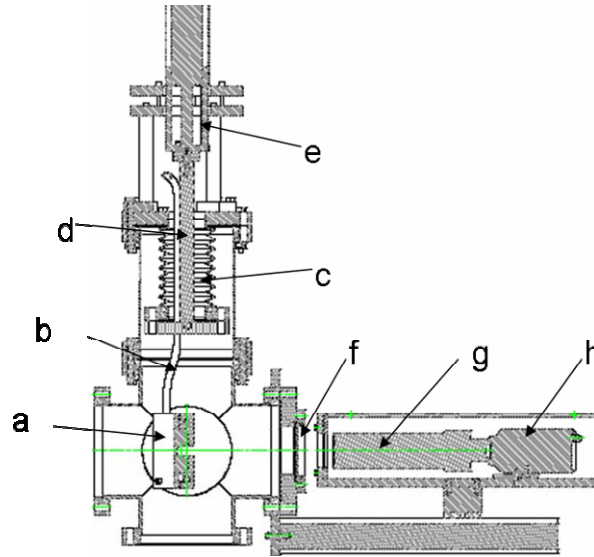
YAG Crystal Actuator assembly used for imaging synchrotron radiation. CLS drawing number 06ID-1/ME/OPT/0119100. The assembly is comprised of an OFHC copper crystal holder (a), copper cooling tube (b), bellows (c), support rod (d), pneumatic actuator (e), glass view port (f), lens (g), and CCD camera (h). SR beam is directed out of the page.
